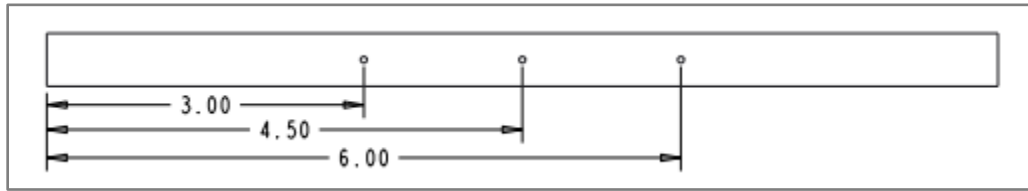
Thermocouple location for vacuum chamber graphite rod in inches.
